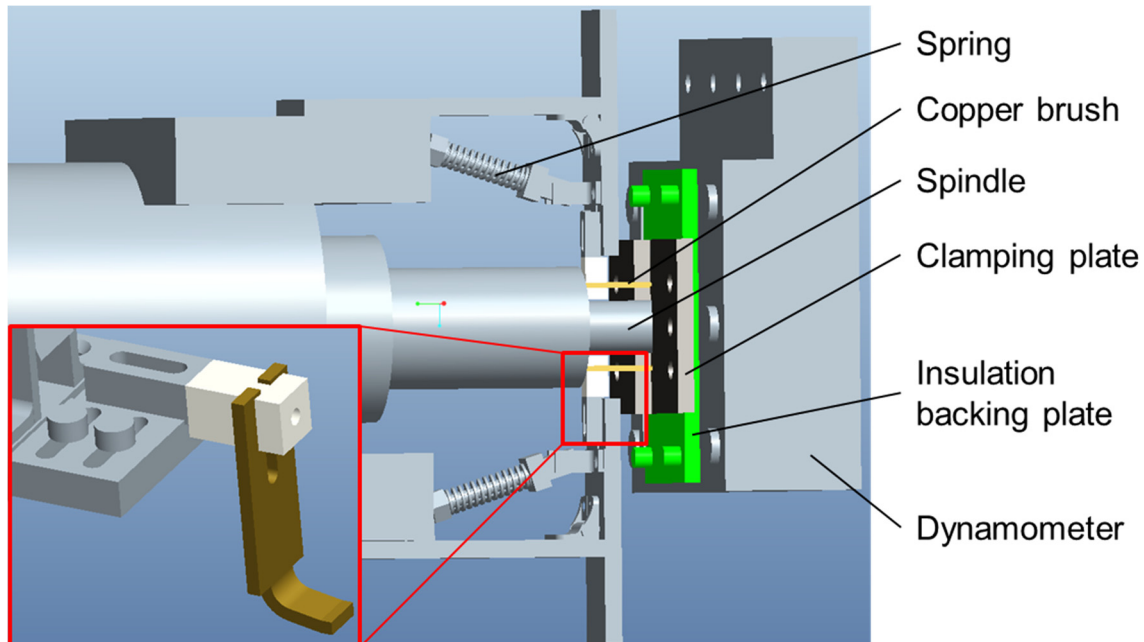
CAD design of the electrically assisted friction stir welding system
